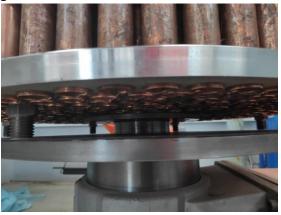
Fixing and centering the part with the "Amifix" device on the robotic system table
